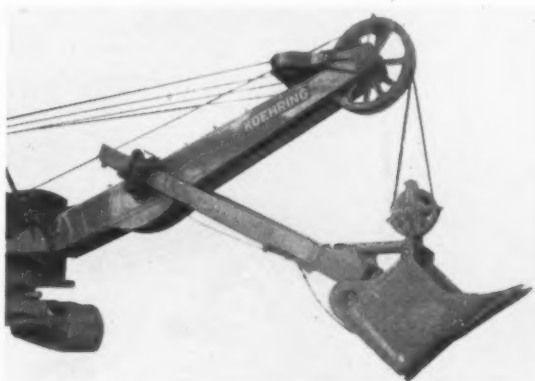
No protruding connecting parts mar the appearance of this arc welded shovel boom
